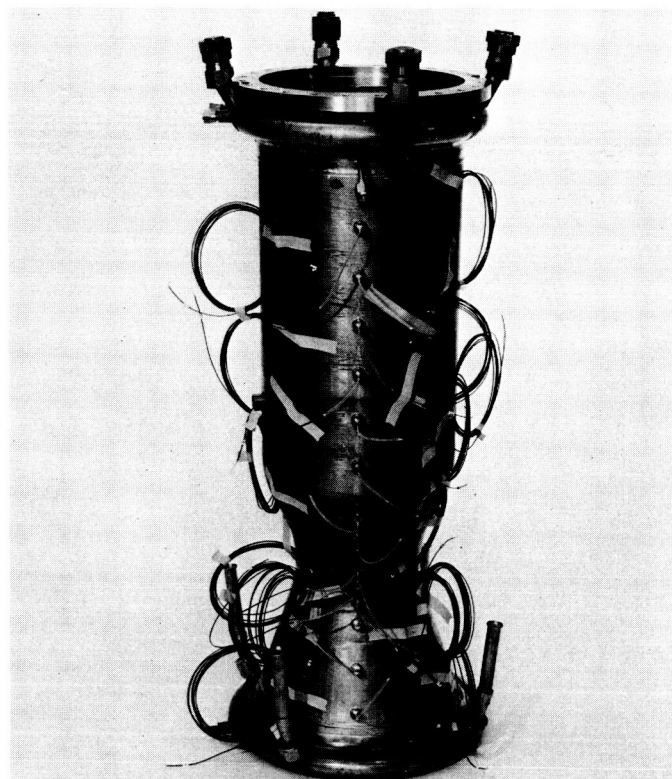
Completed 3.5:1 area ratio welded-rib Thrust Chamber 41
